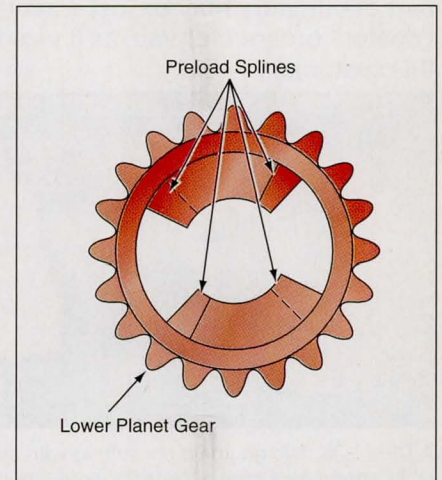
The Preload Splines on each upper and lower planet gear engage similar preload splines in an associated lower planet gear.
